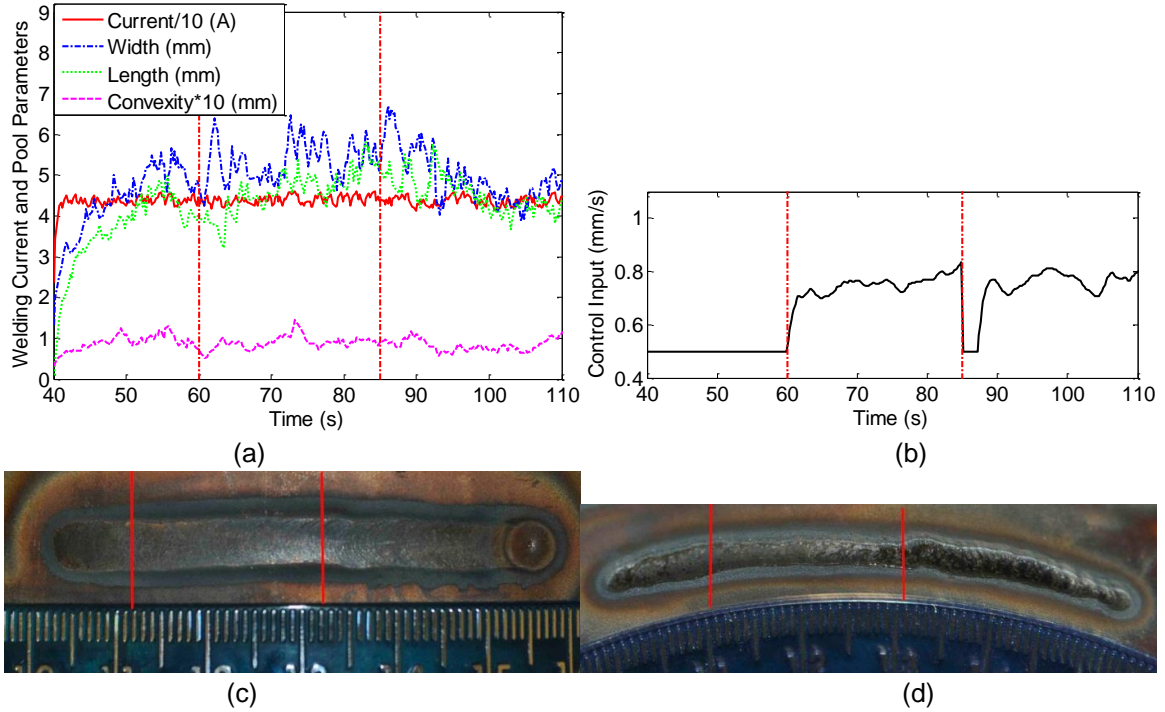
Experiment 2 results (a) Welding current and weld pool parameters (b) Control input (c) Front-side bead (d) Back-side bead.
